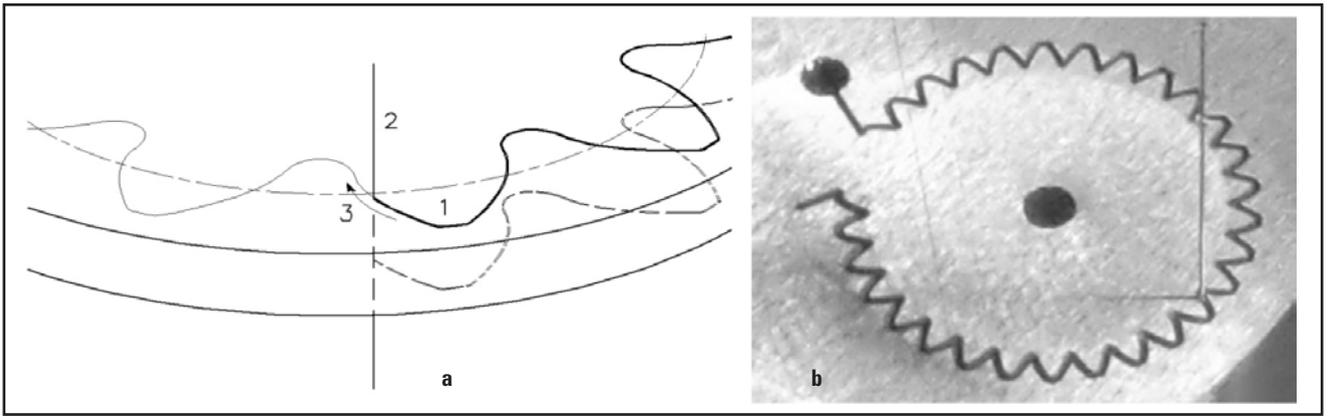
a. schematic of contour gear machining: 1) gear profile; 2) cutting tool; 3) cutting direction; b. wire EDM gear cutting.
